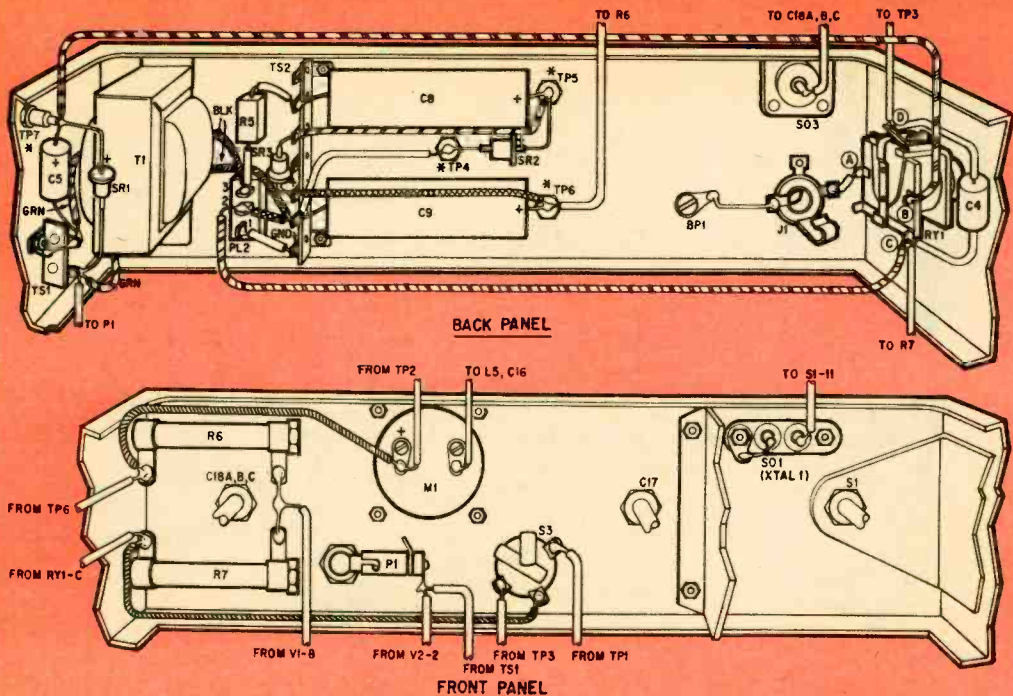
Head-on views of rear (top) and front (bottom) panels show component locations. Install all parts before mounting subchassis. C17's and C18's extension shafts pass through panel bearings (Allied 44 U 096). Portion of home-brew bracket for crystal sockets and S1 is shown at right of front panel.
